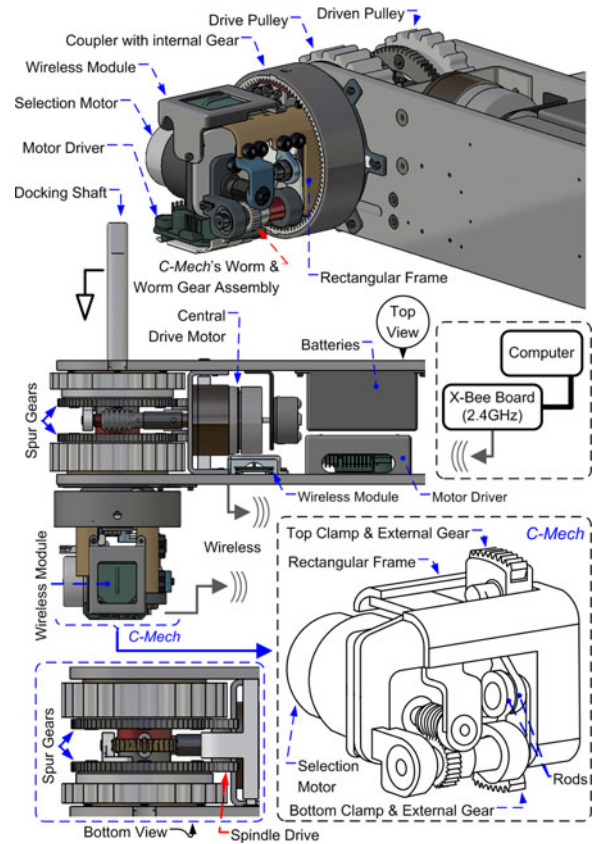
CAD illustration of the proposed coupling mechanism showing all relevant mechatronic components.
